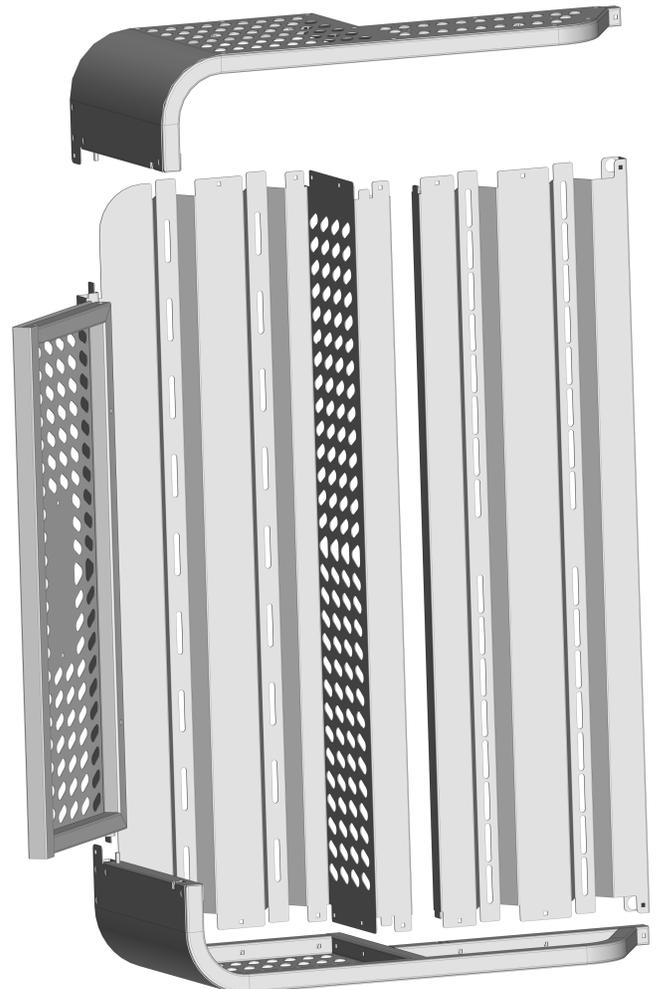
Place one side weldment on the ground and set each pan into place. Secure with carriage bolts, flat washers, and nylocks.
